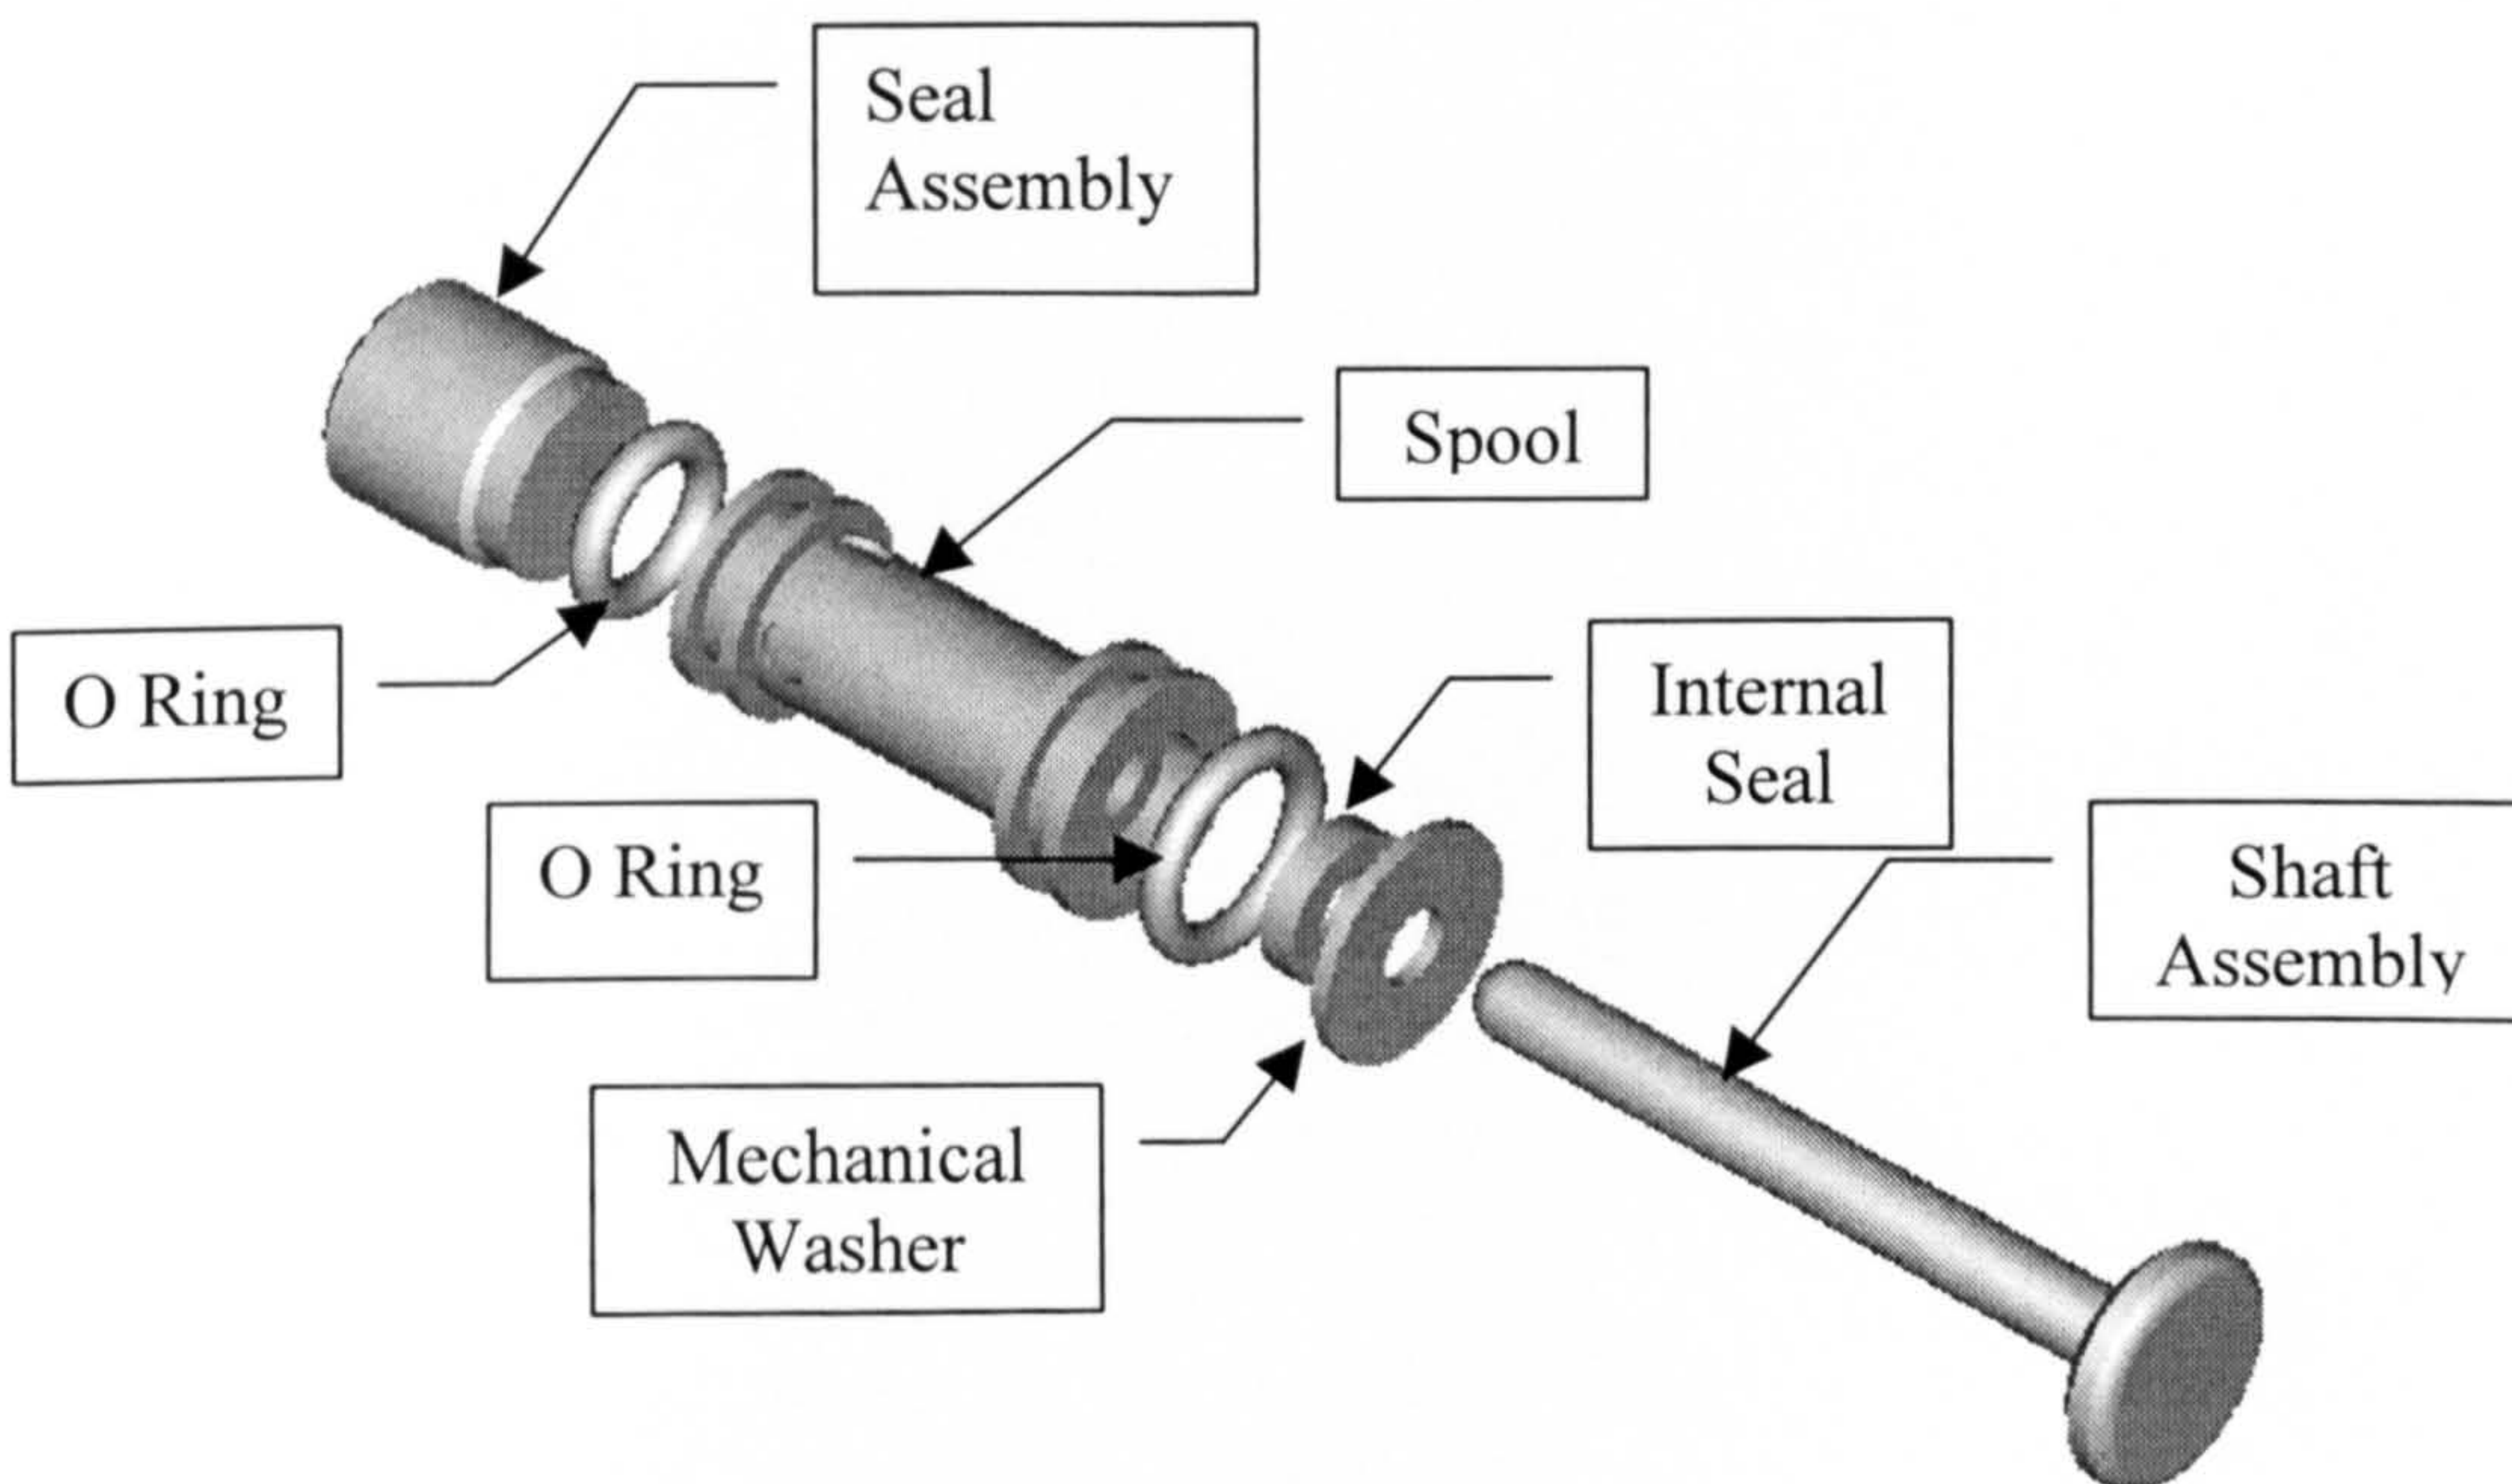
Exploded Model Of Inlet Valve Sub Assembly
